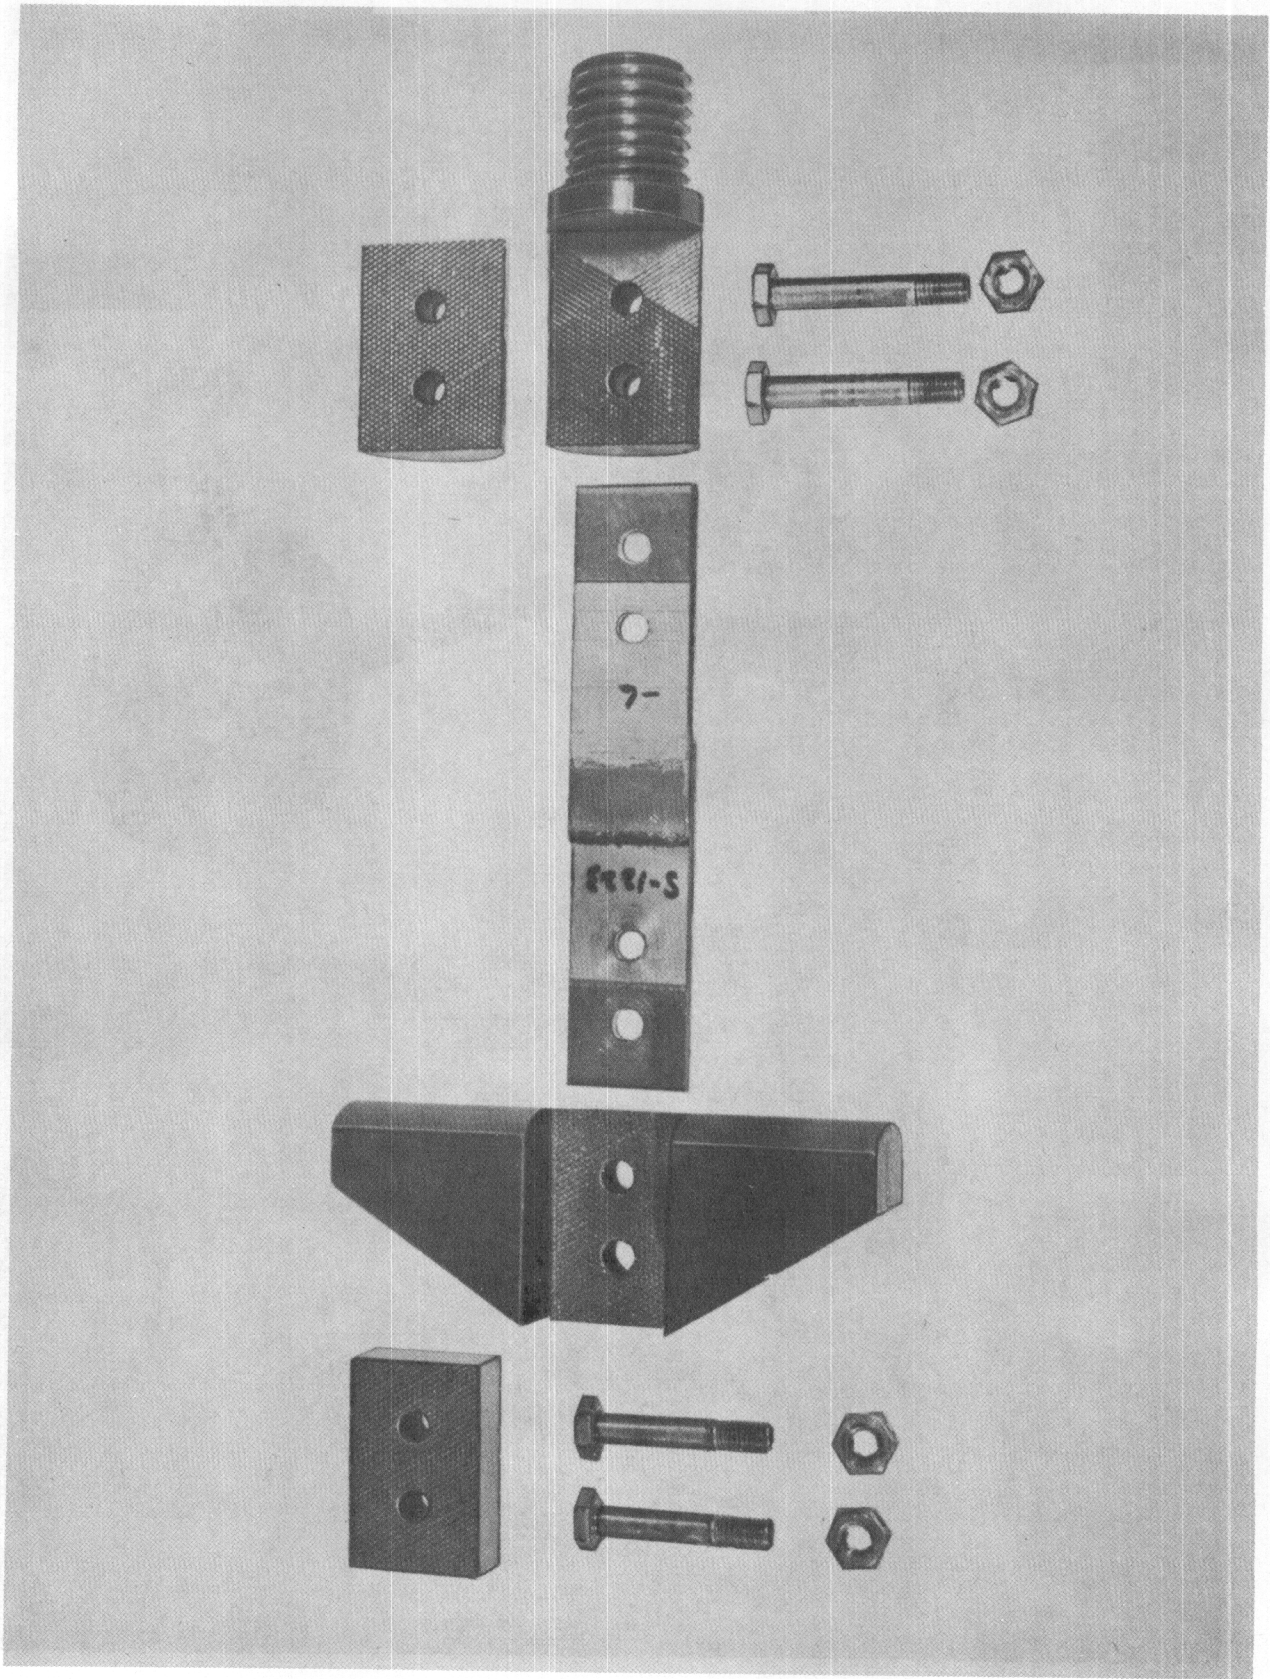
Impact Test Specimen and Exploded View of Loading Grips
